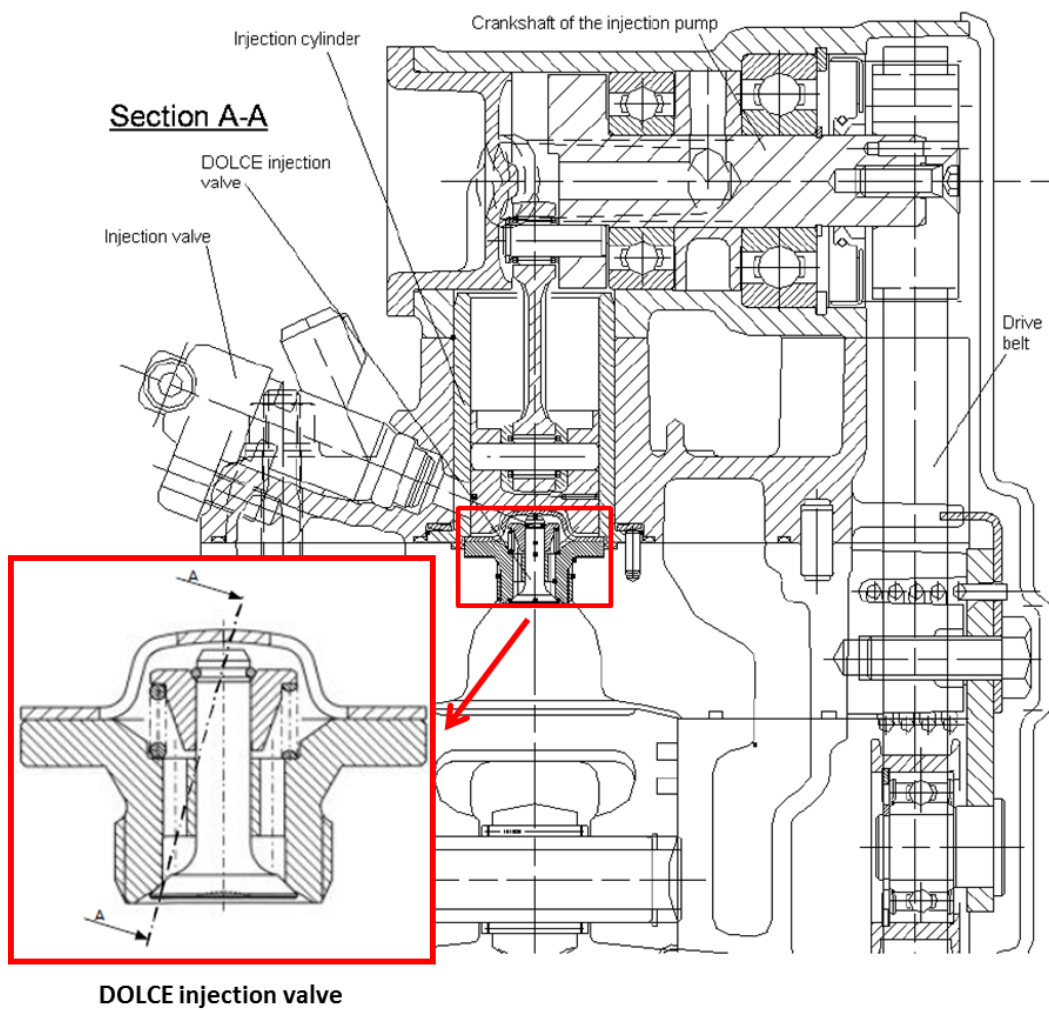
Cross section of the DOLCE cylinder head including DOLCE injection valve; adapted from [89, p. 19; 75]
